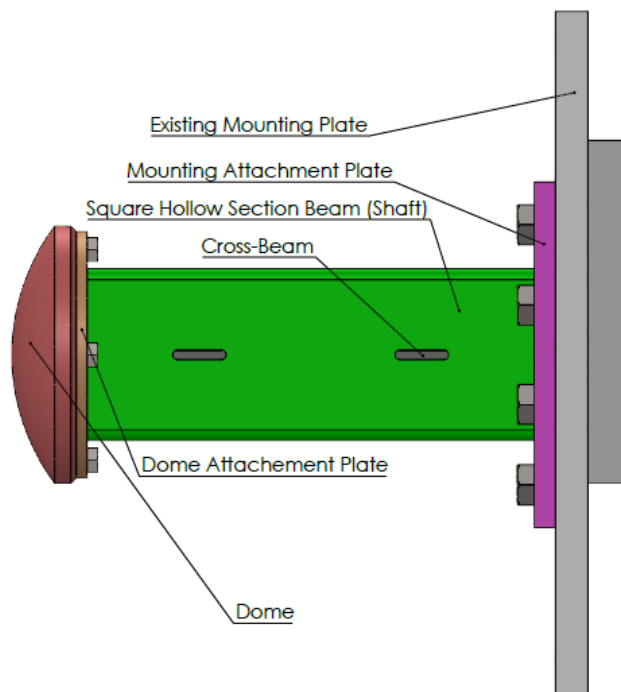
Rigid Indenter Full Assembly with Descriptions.
